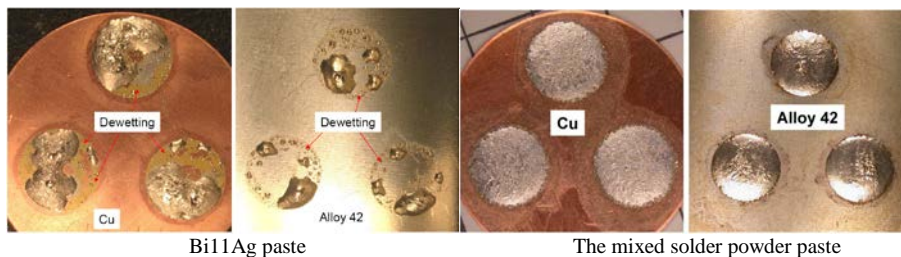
Improved wetting of the mixed solder paste comparing Bi/11Ag paste on Cu to Alloy 42 coupons.
